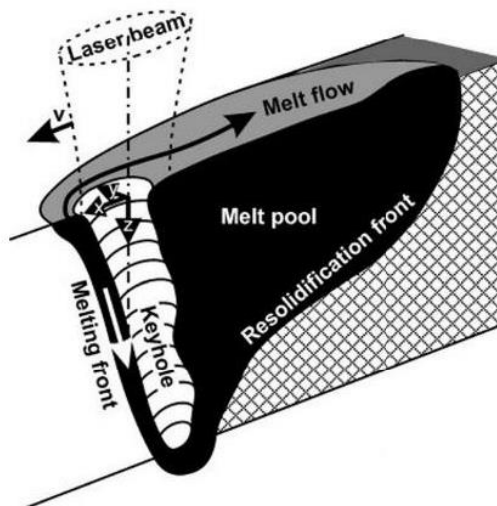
Keyhole mechanism in laser welding [46]
